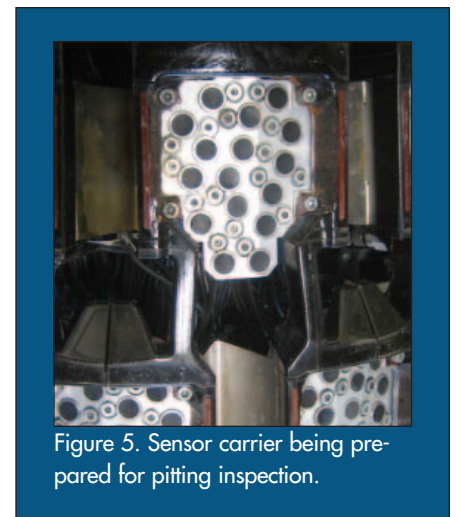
Sensor carrier being prepared for pitting inspection.
